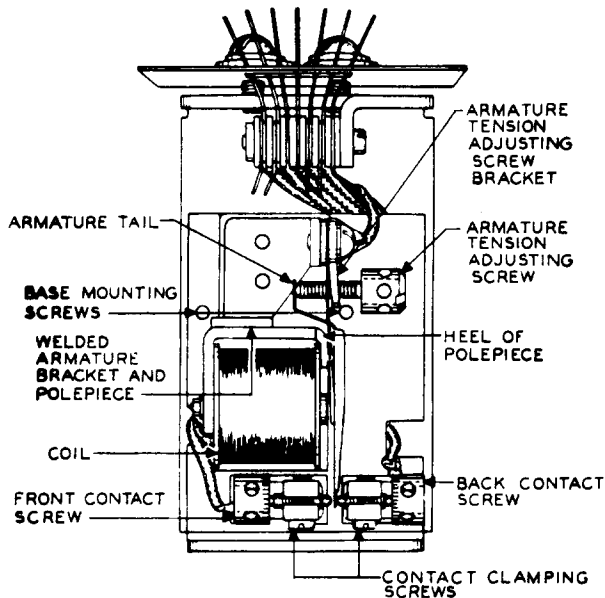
267-type and D-175787 Relays Equipped With Welded Armature Bracket and Pole Piece - Top View
